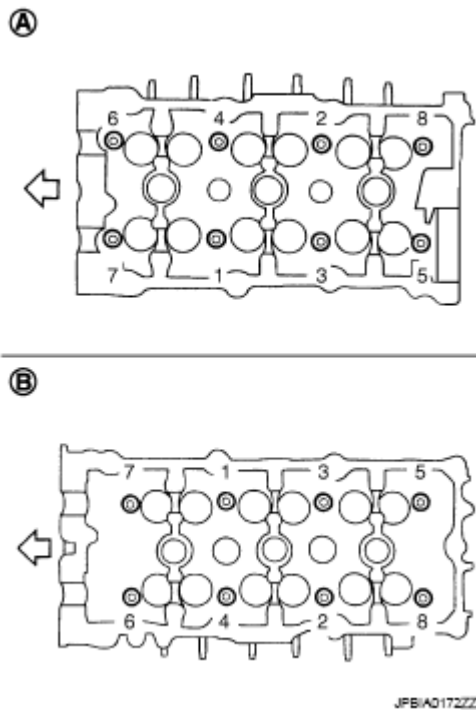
Identifying Cylinder Head Bolts Tightening Sequence
